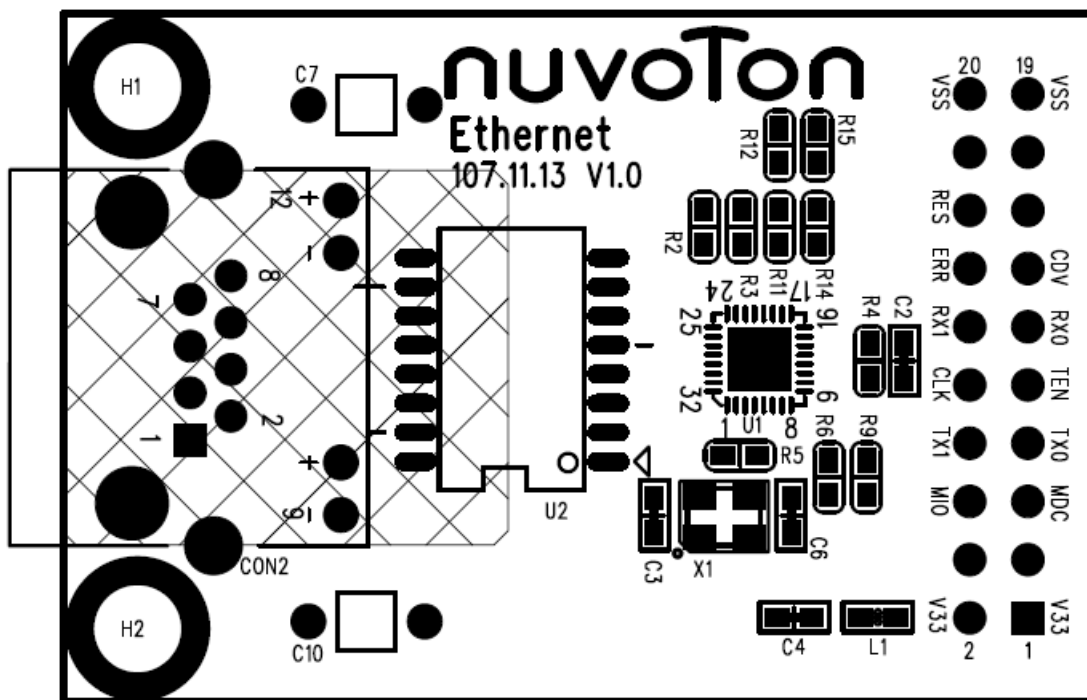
NK-NUC98R Ethernet Daughter Board Front PCB Placement
